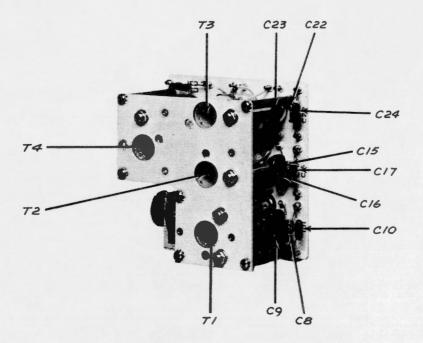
High-Frequency Oscillator A1A8, Parts Location and Test Points, Disassembled
